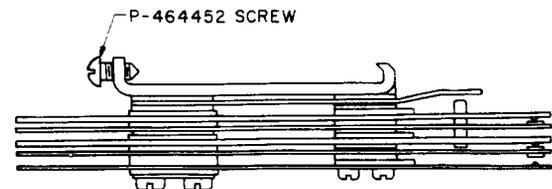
Clamp-Type Holding Off-Normal Spring Assembly
